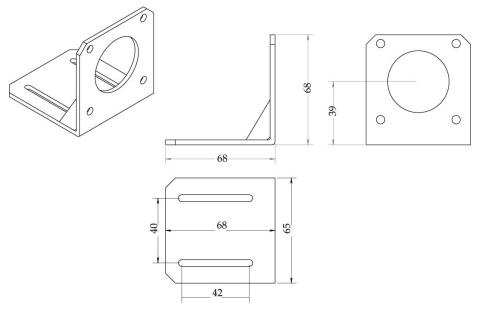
Actuator Mounting Bracket (All Dimensions in mm)
